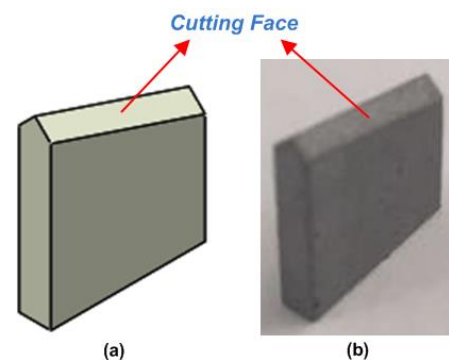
Cutting tooth for rock drilling/coring. (a) as-designed tooth, (b) manufactured tooth.
